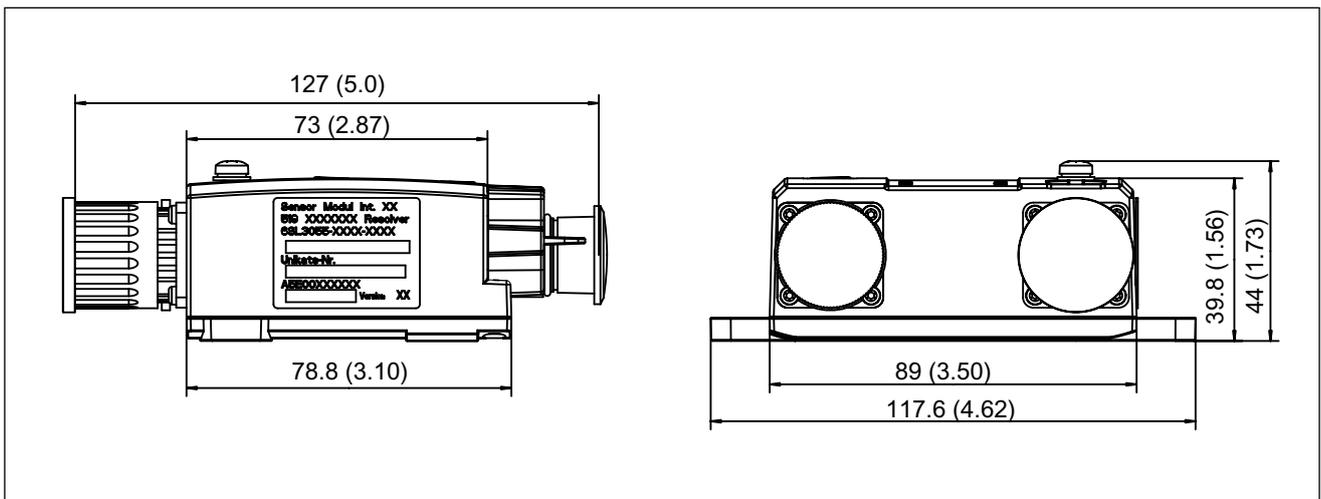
Dimension drawing SME120, Order number 6SL3055-0AA00-5JA0
